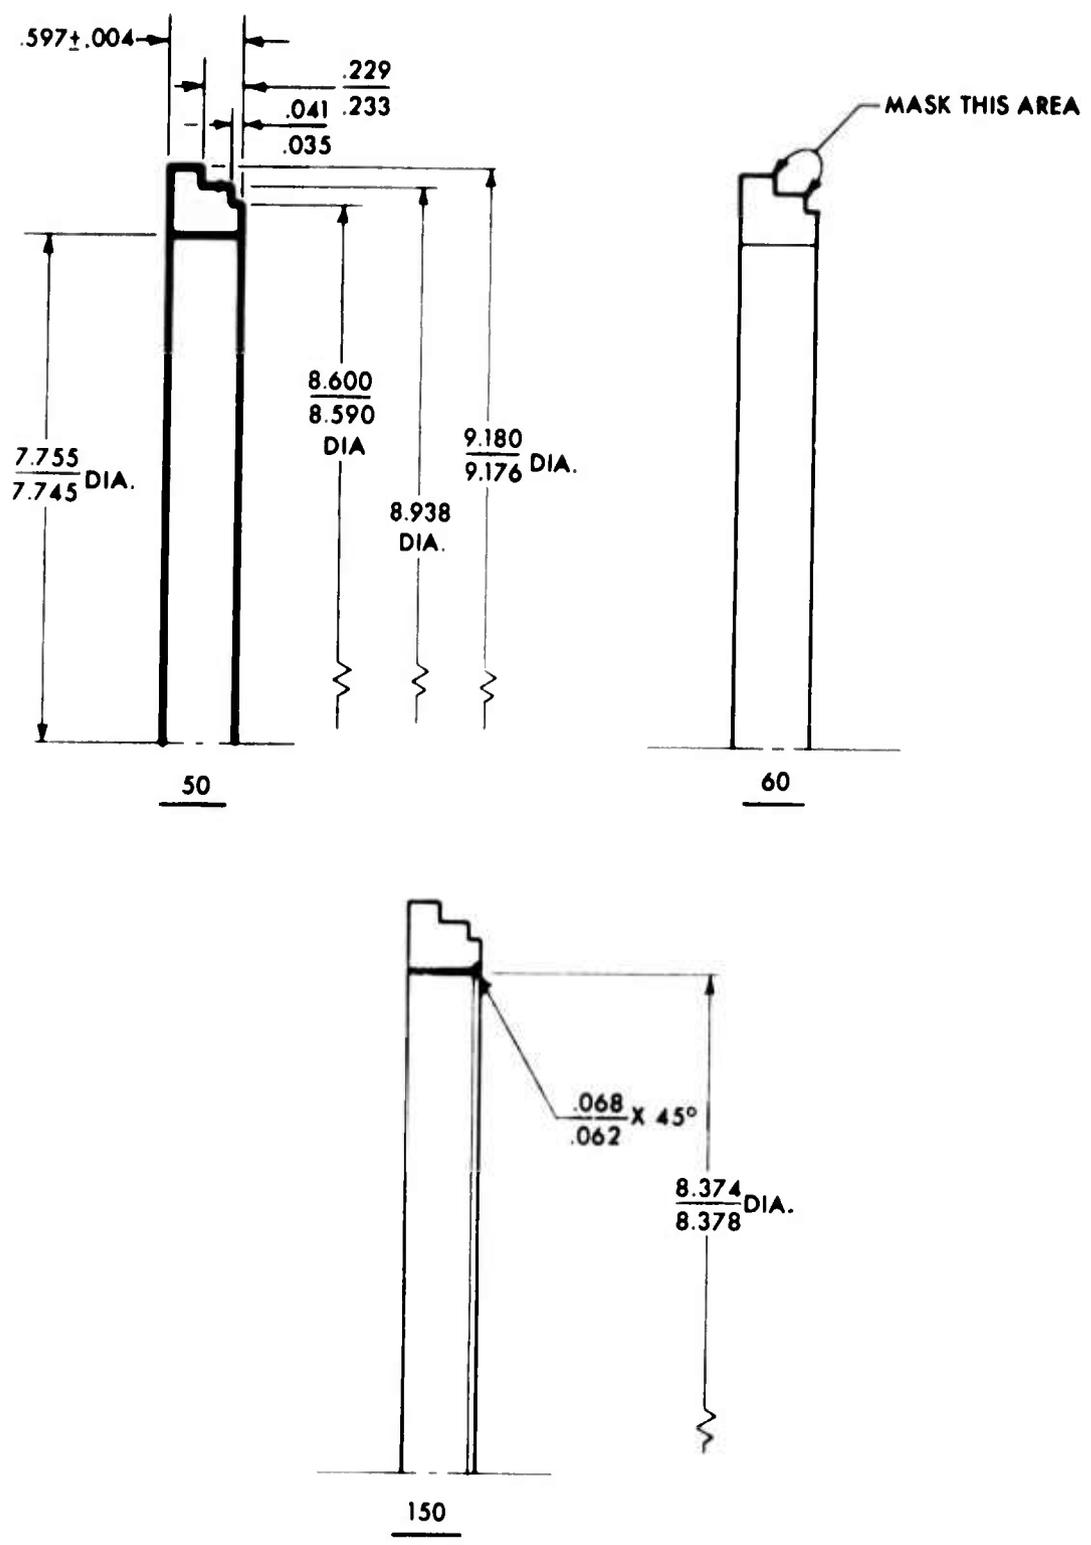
RG351-11183-102, Machine Operation Drawing.
